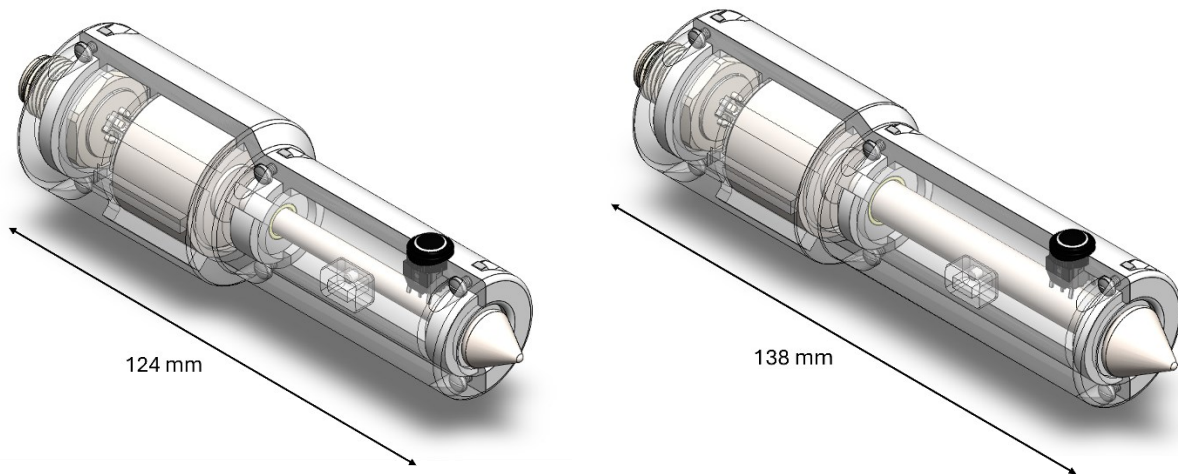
Assembled Handpieces. Left, 10 g impact rod; right, 30 g impact rod
